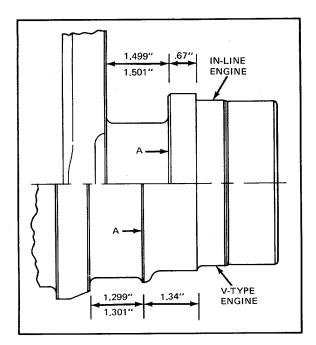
Standard Dimensions at Crankshaft Thrust Surfaces - In-Line and V-Type Engines
